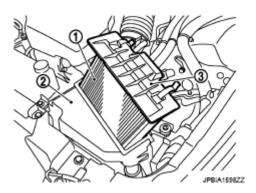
Identifying Holder, Clips And Air Cleaner Case Courtesy of NISSAN MOTOR CO., U.S.A.
